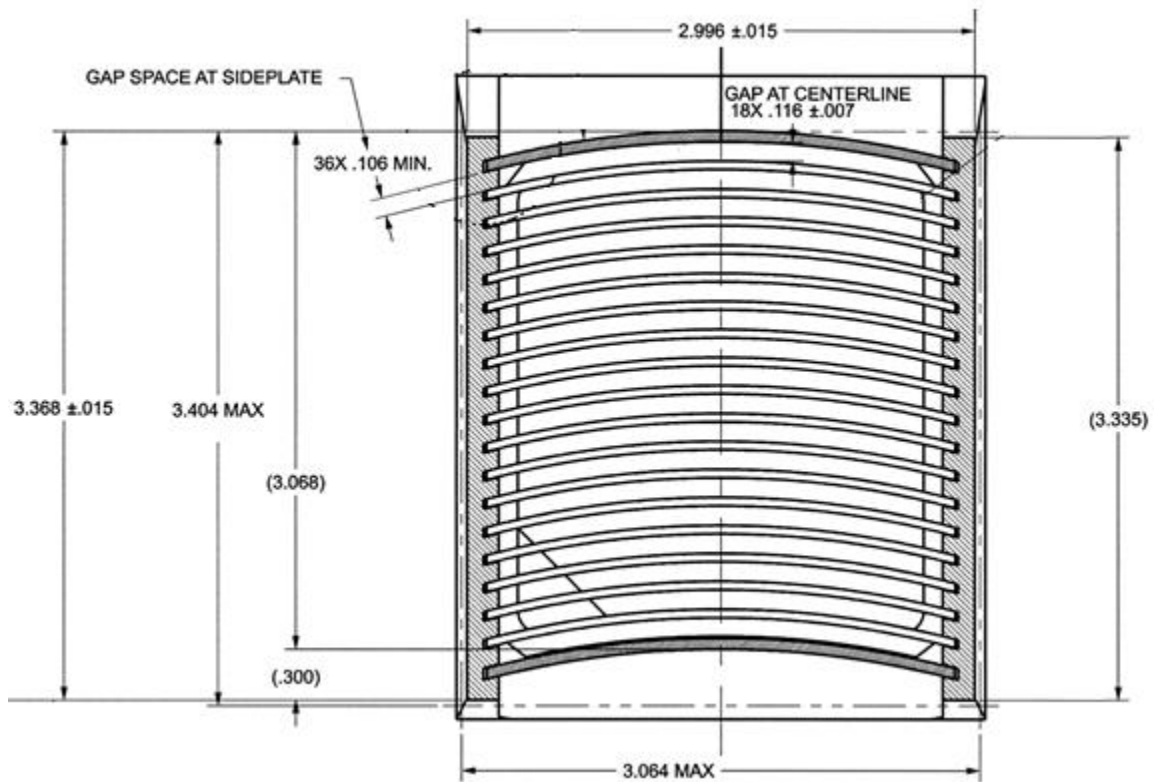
Cross Sectional View of Fuel Element (Dimensions in Inches)
